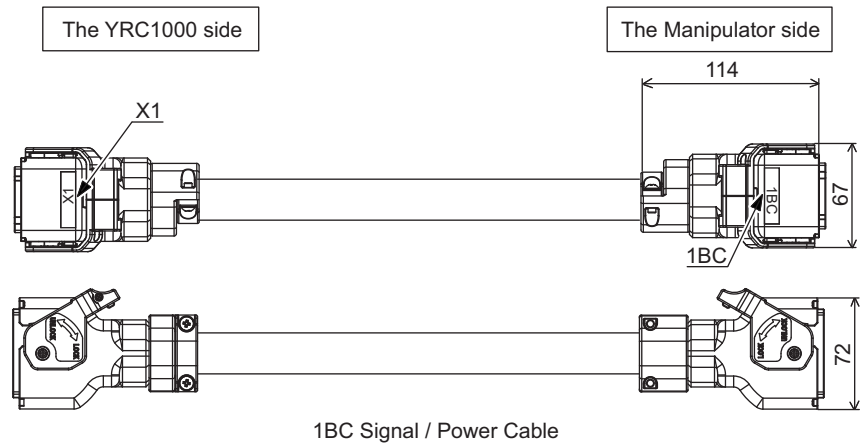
(b): Manipulator Cable for YRC1000micro
